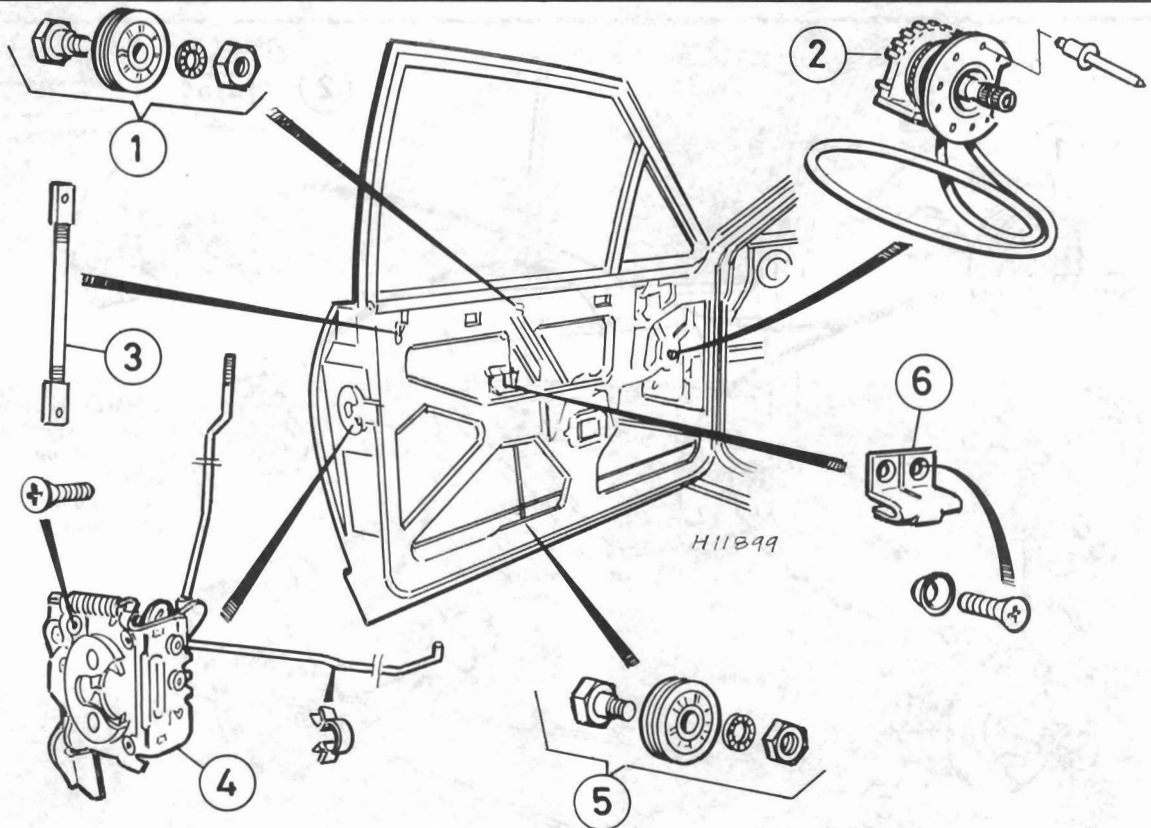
Door lock and window regulator components (front door) (Sec 12)
